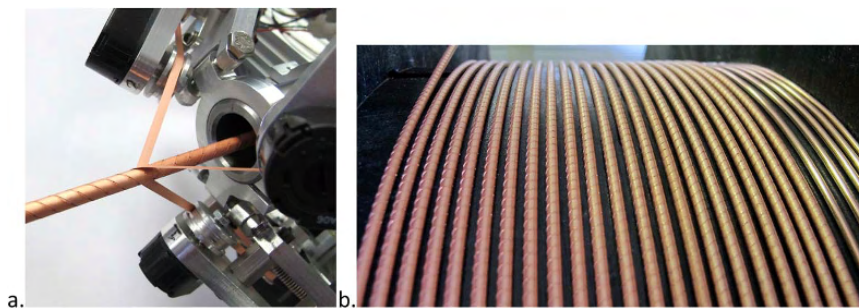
(a) Custom CORC® cable winding machine. (b) A 25 m long CORC® wire is being wound [40].
